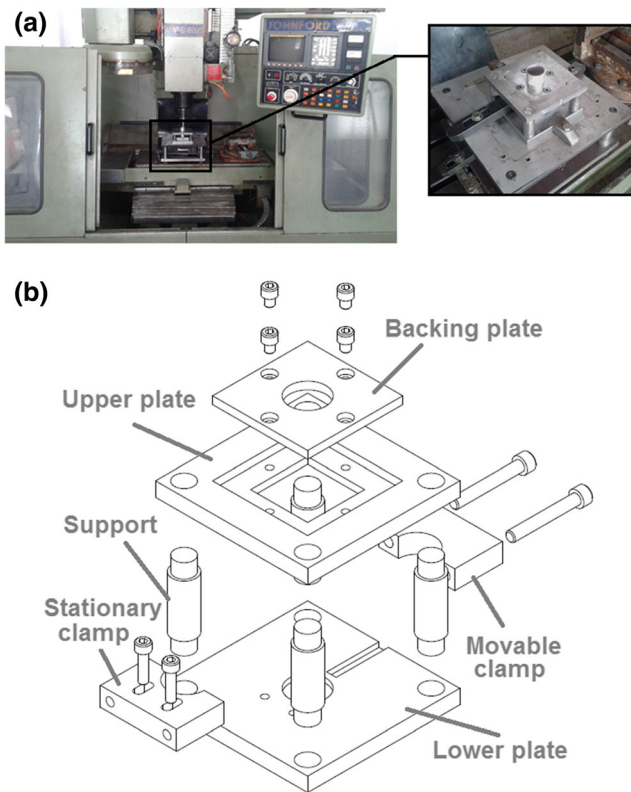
a The experimental setup mounted on the CNC milling machine. b The exploded view of the designed rig for incremental tube end flaring
